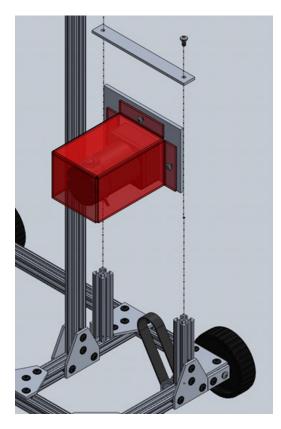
Exploded view showing installation method of motor assembly onto frame.
